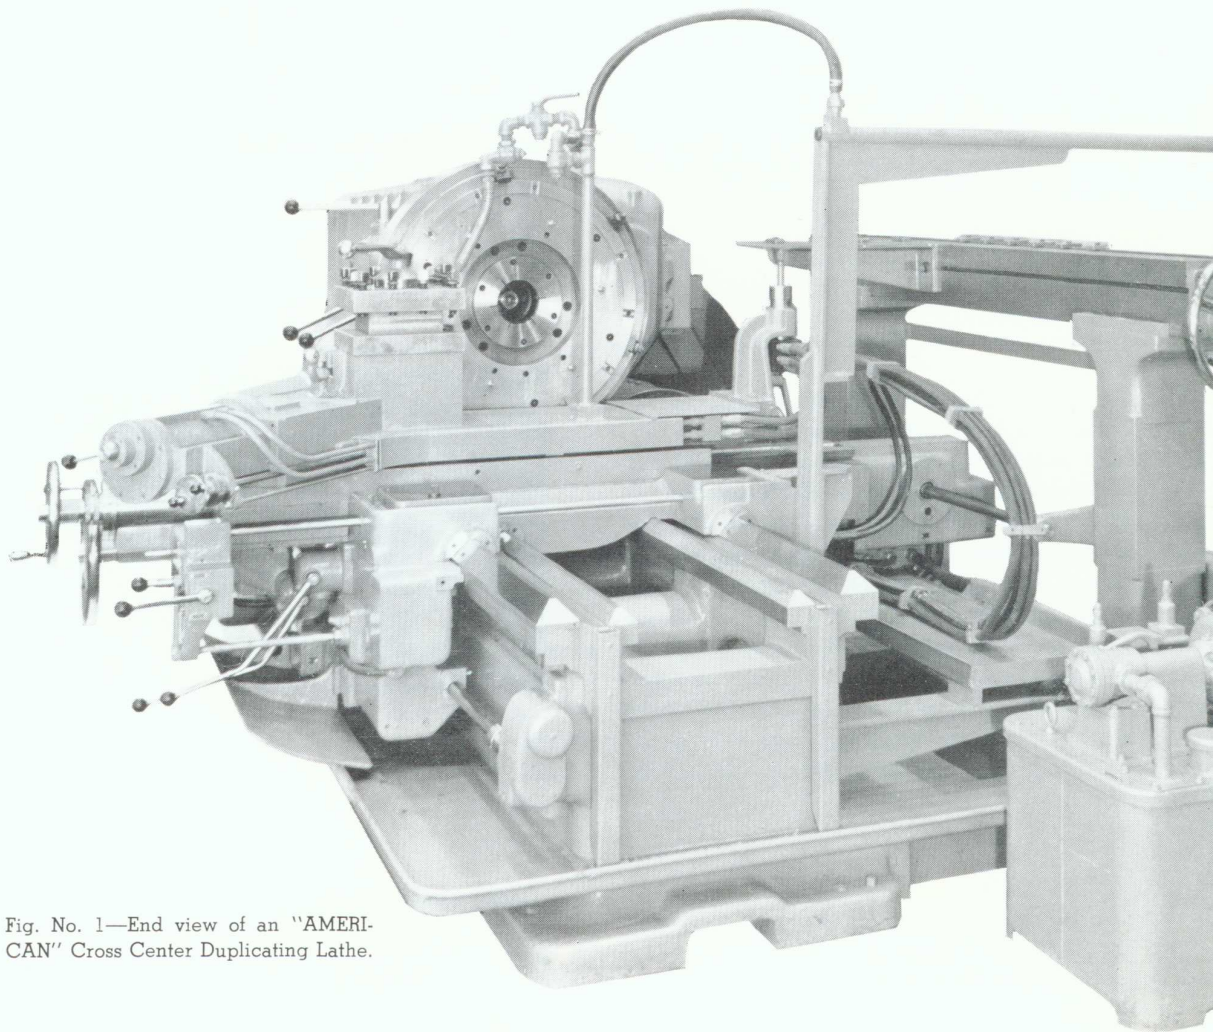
End view of an "AMERICAN" Cross Center Duplicating Lathe.
